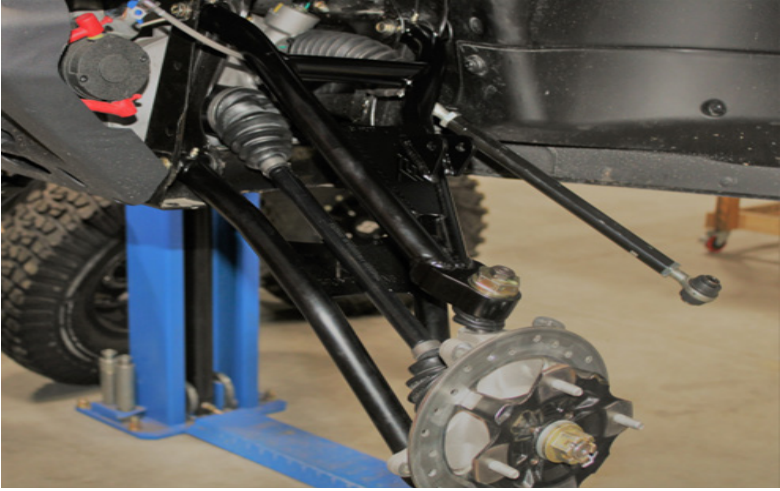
Mount upper control arm using 15mm Socket and 15mm Wrench
